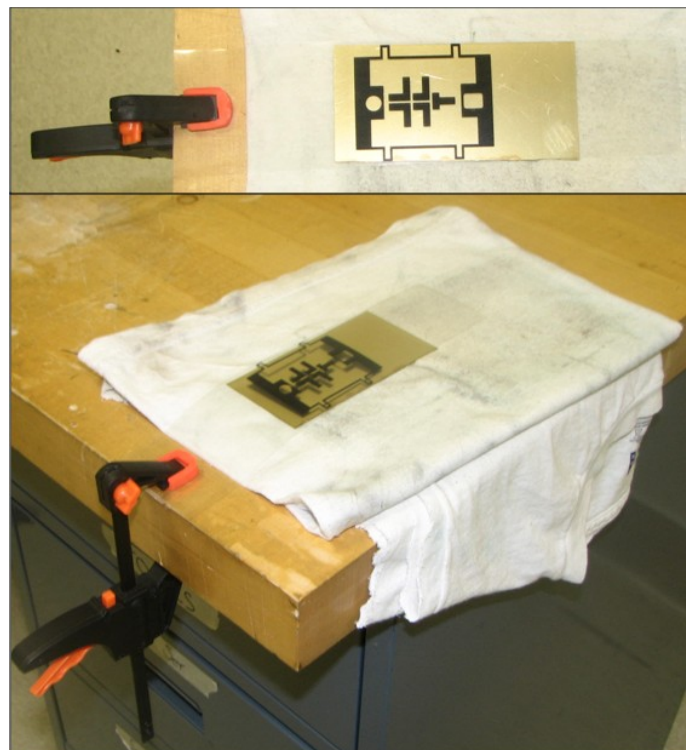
Mock example of ironing arrangement for ink transference to brass or copper. Above, Top view. Bottom, Isometric view
